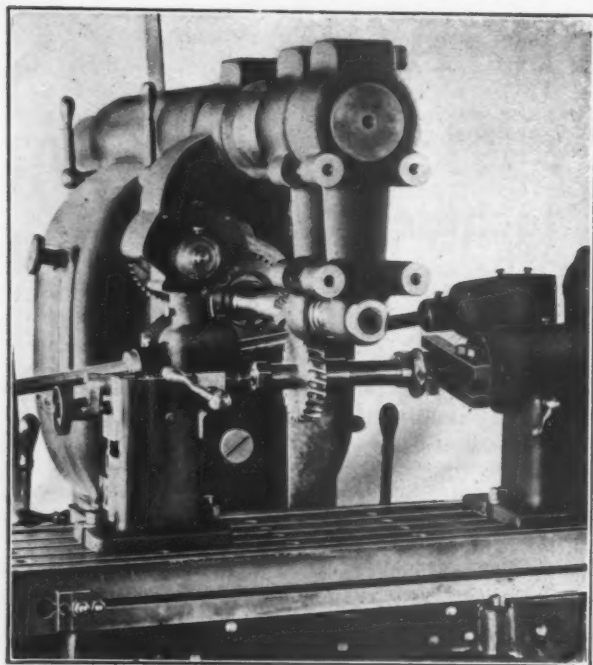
The Attachment Applied to Spiral Gear Cutting.
